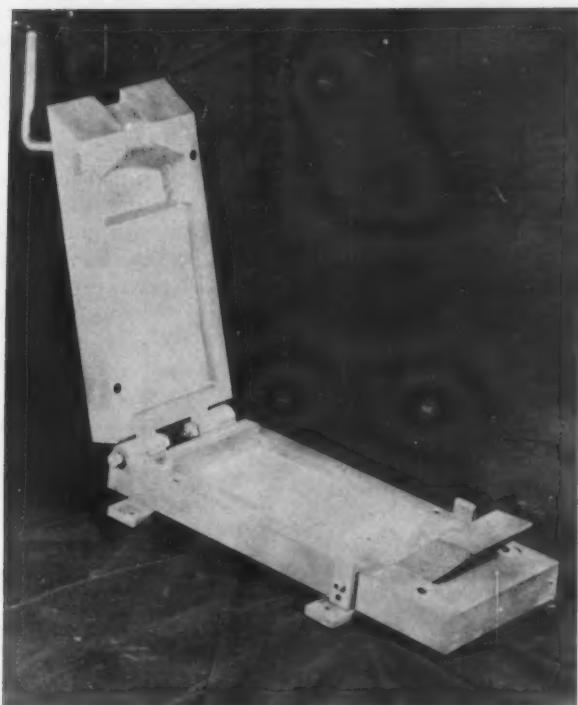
Mold developed which produced cast slabs one in. thick \times 5 in. wide \times 7 in. long.
